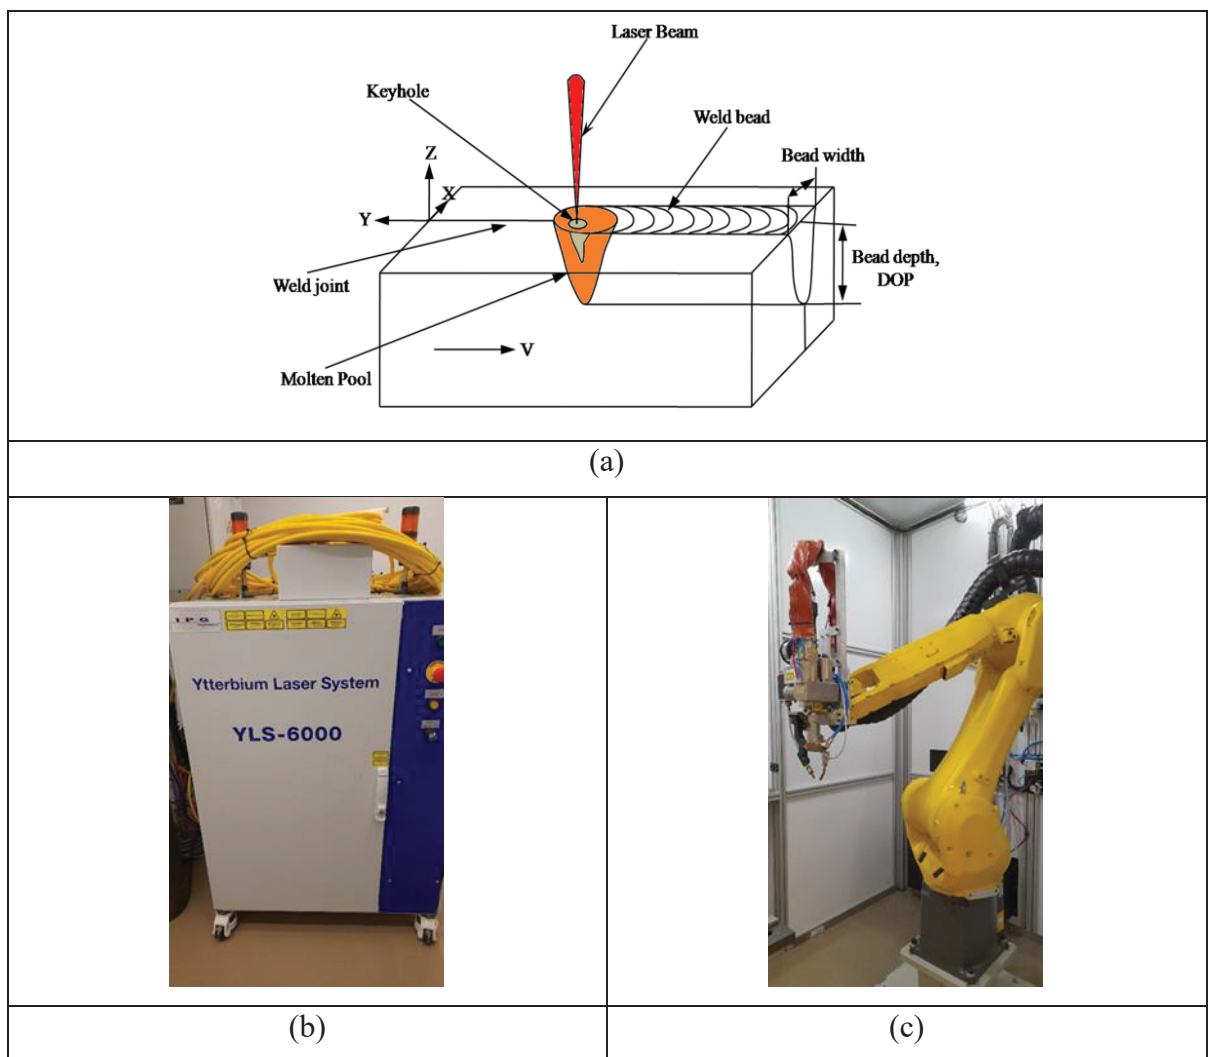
Schematic of laser welding with (a) different welding definitions and components, (b), and (c) experimental setup of laser welding source and laser head
